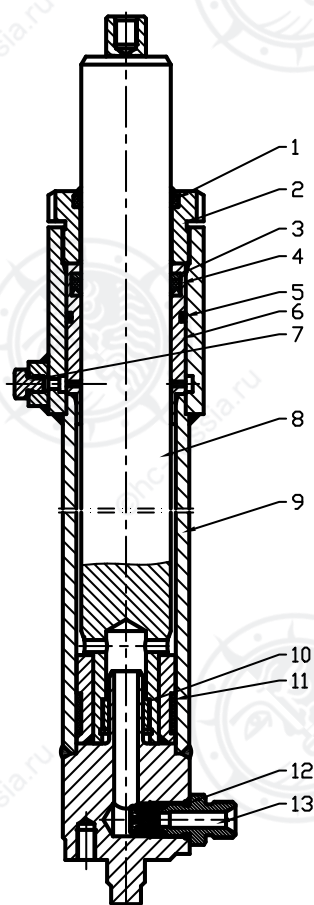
Lifting cylinder (3.0t-3.8t)
